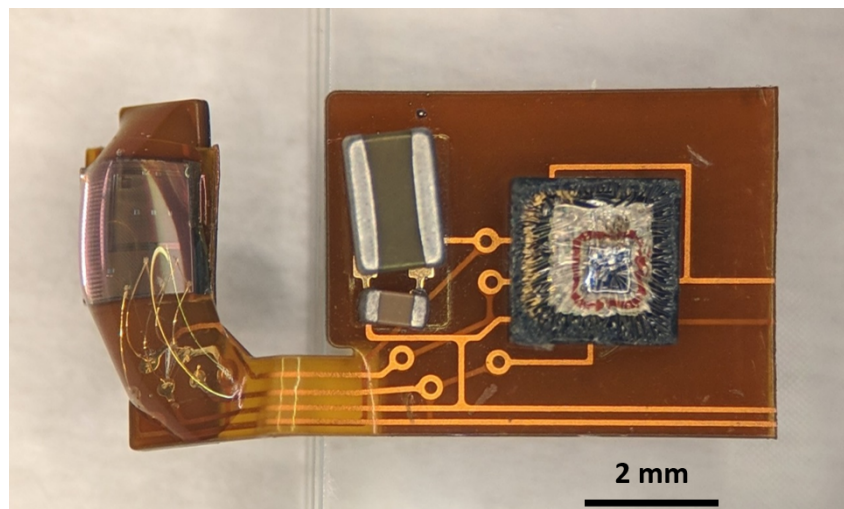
Implant after the bending the PCB and subsequent parylene-on-oil deposition but before the silicone steps.
